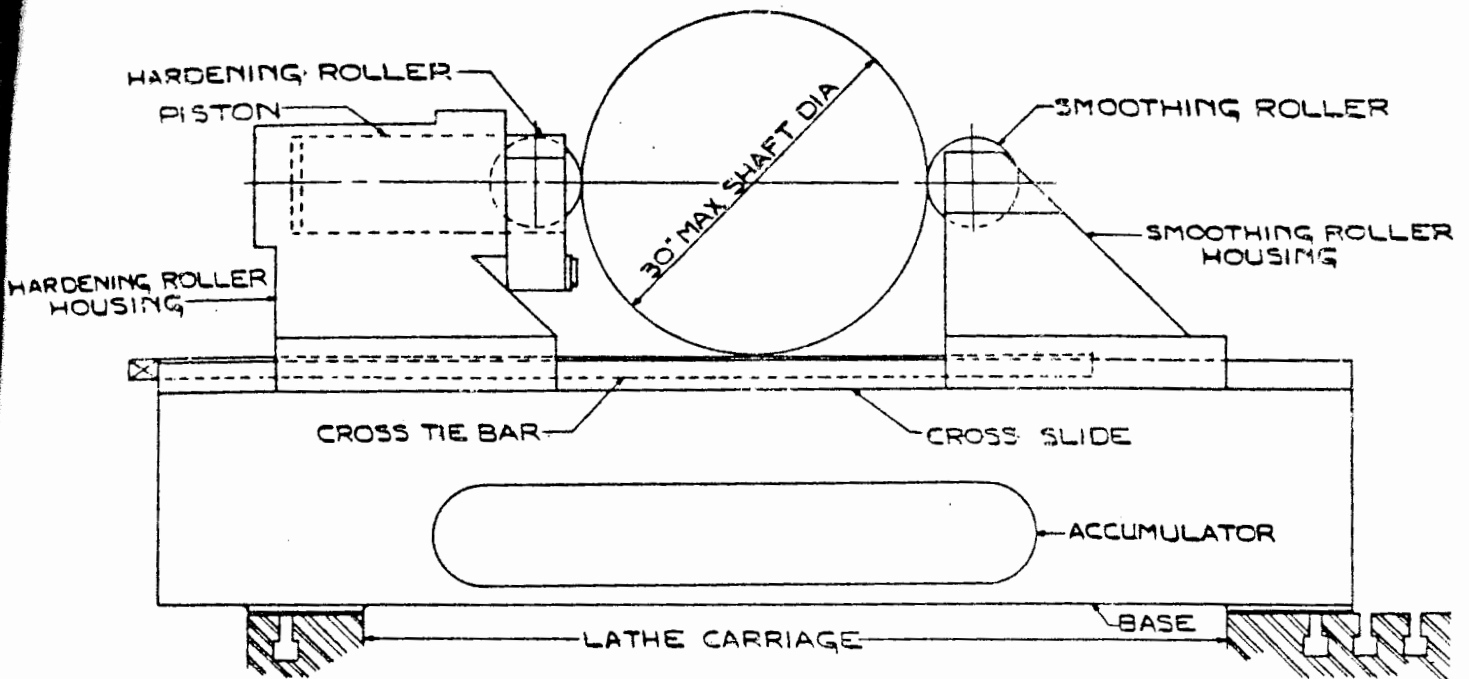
GENERAL ARRANGEMENT OF NEWPORT NEWS SURFACE COLD ROLLING EQUIPMENT.
